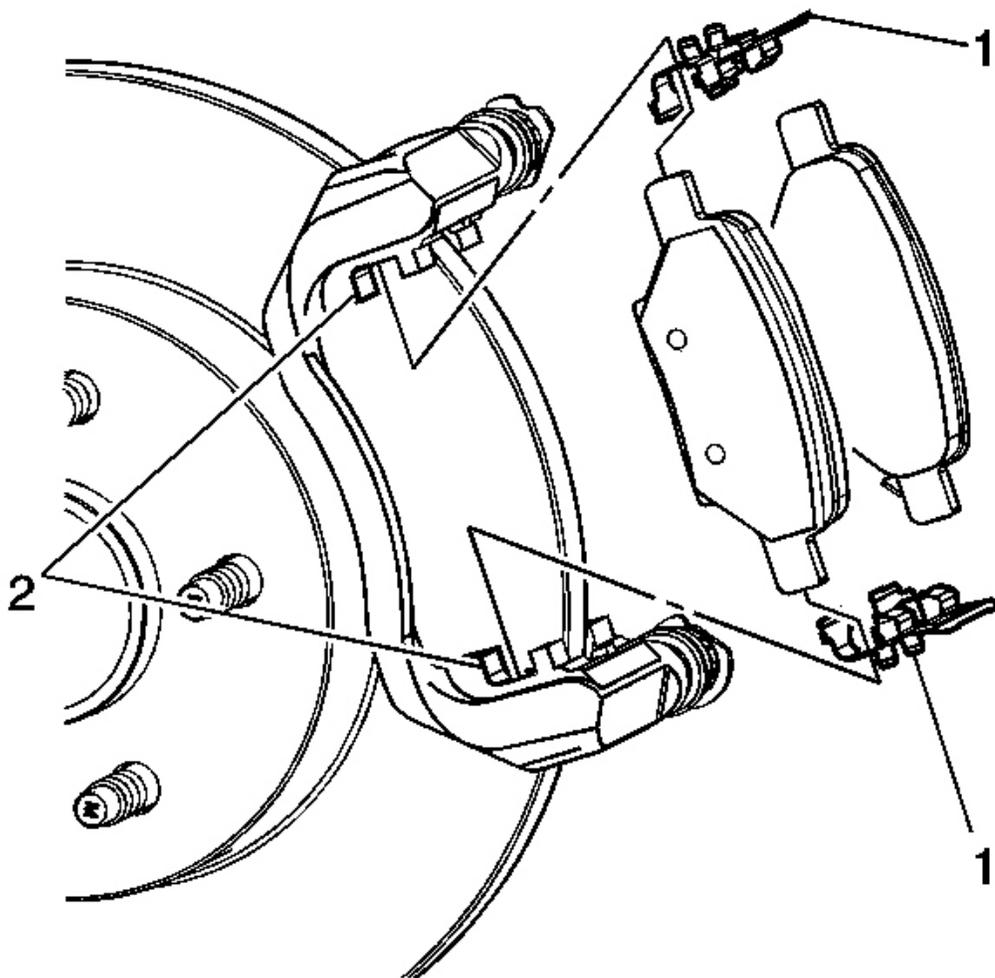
Identifying Brake Pad Retainers & Caliper Bracket - Rear
